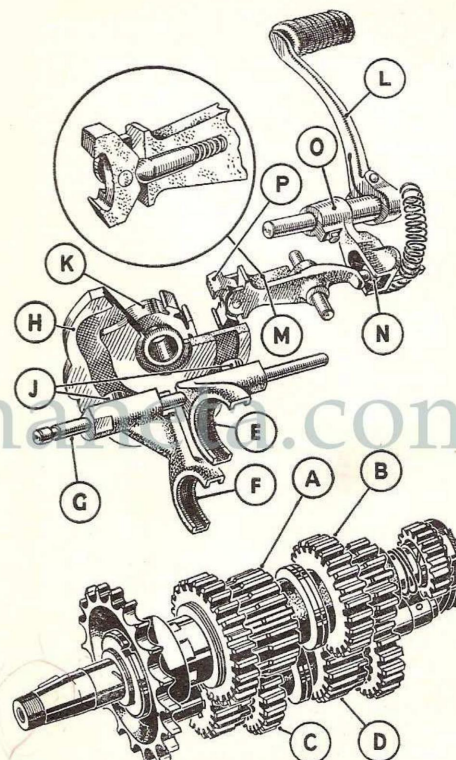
Gear change mechanism and gear cluster (4-speed gearbox).
